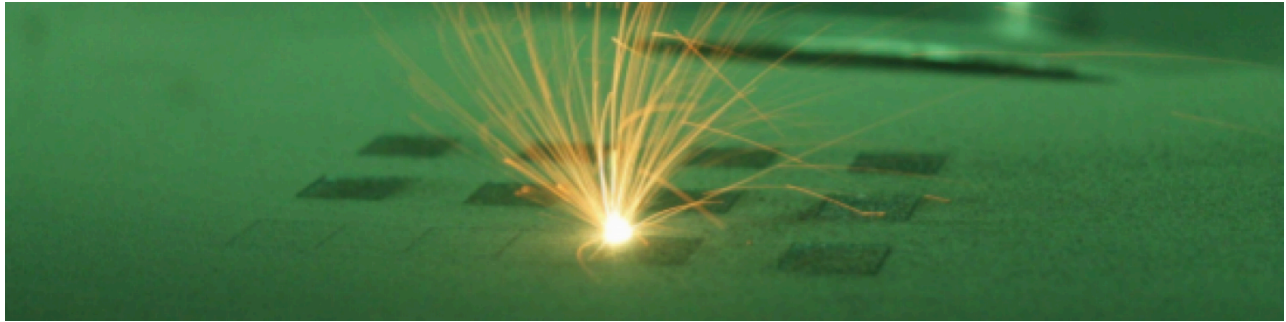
Example of a parameter development job in a Laser Powder Bed Fusion machine
